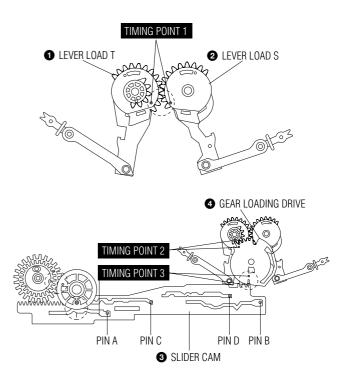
Gear Loading Drive, Slider Cam, Ass'y Lever Load S, T Assembly
